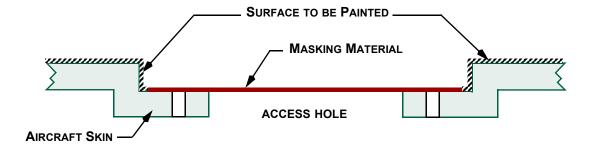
MASKING ACCESS HOLES (CROSS SECTION AT ACCESS HOLE)
